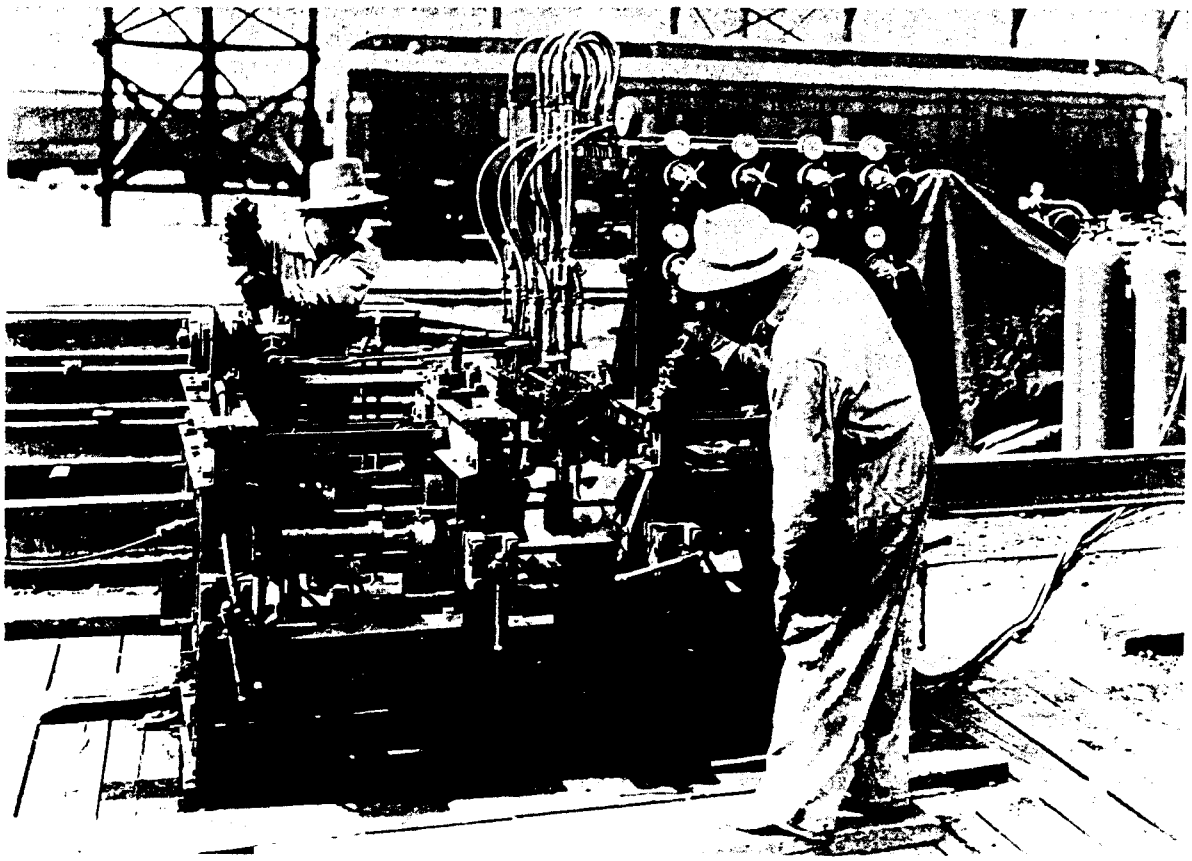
Pressure Gas Welding Railroad Rails
